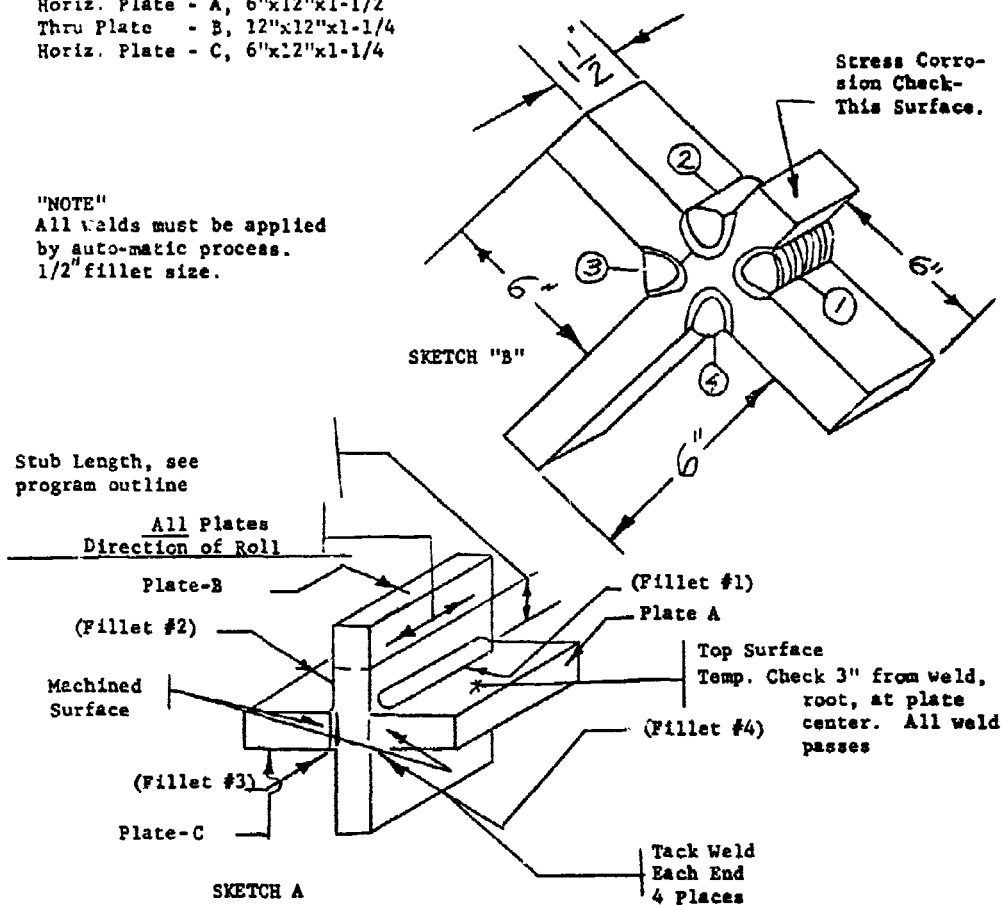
Design and fabrication of cruciform structure and cruciform specimens.
